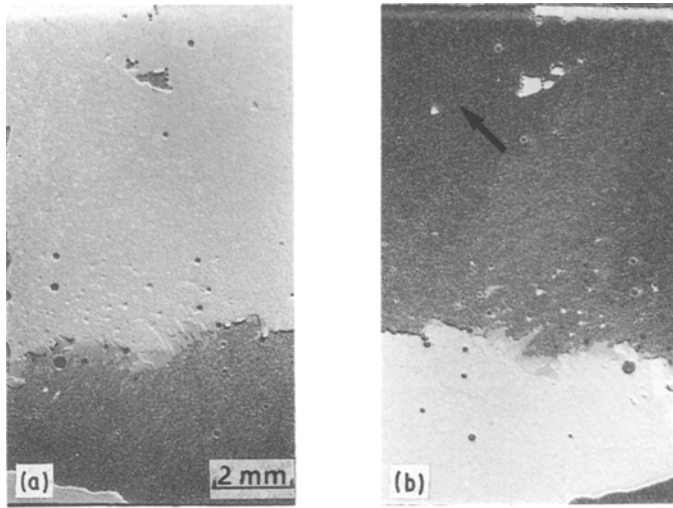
Optical micrographs revealing typical mating fracture surfaces of shear failed SL specimens. Note fracture start at crack origin sites in the interface region: (a) lacquer side; (b) metal side.
